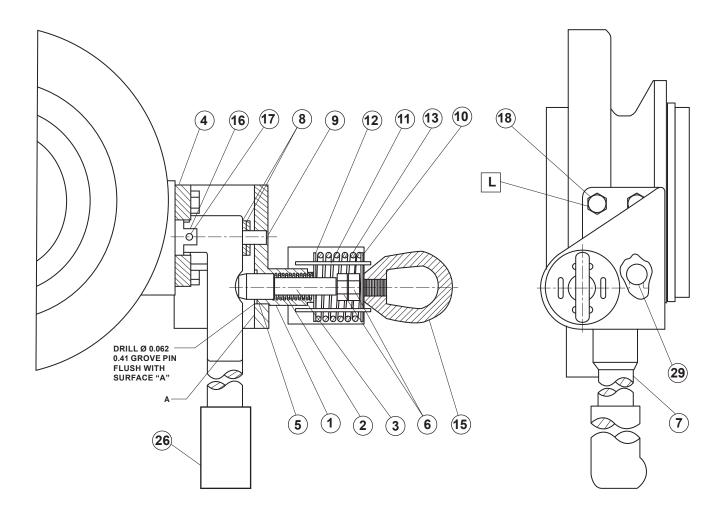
Type C404-32 Flanged Internal Valve Assemblies
